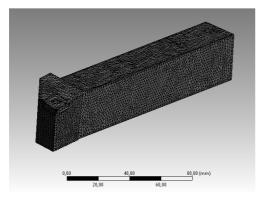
Spreading of FEM mesh over the cutting tool, 1 mm
